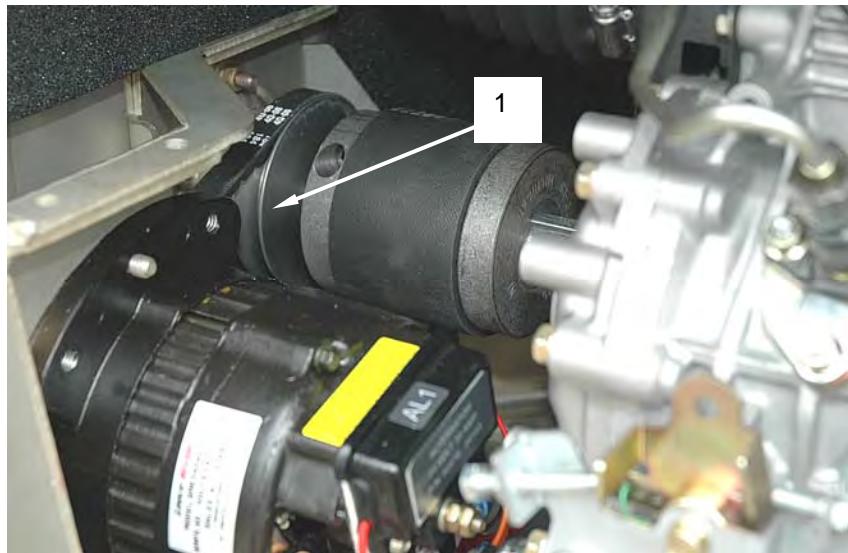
Inspect the Alternator Belt for Damage or Wear.
